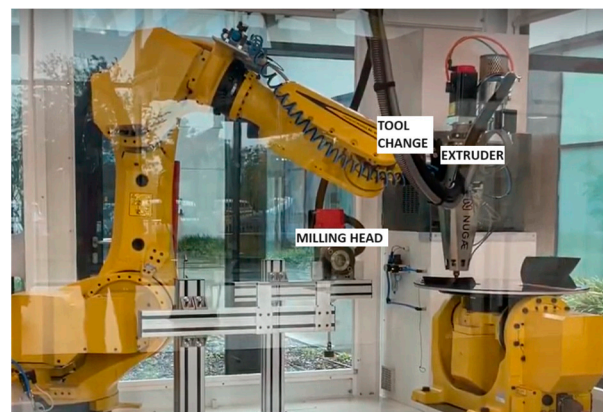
The Nugae extruder, tool-change system, and milling system on Fanuc M8001a.
